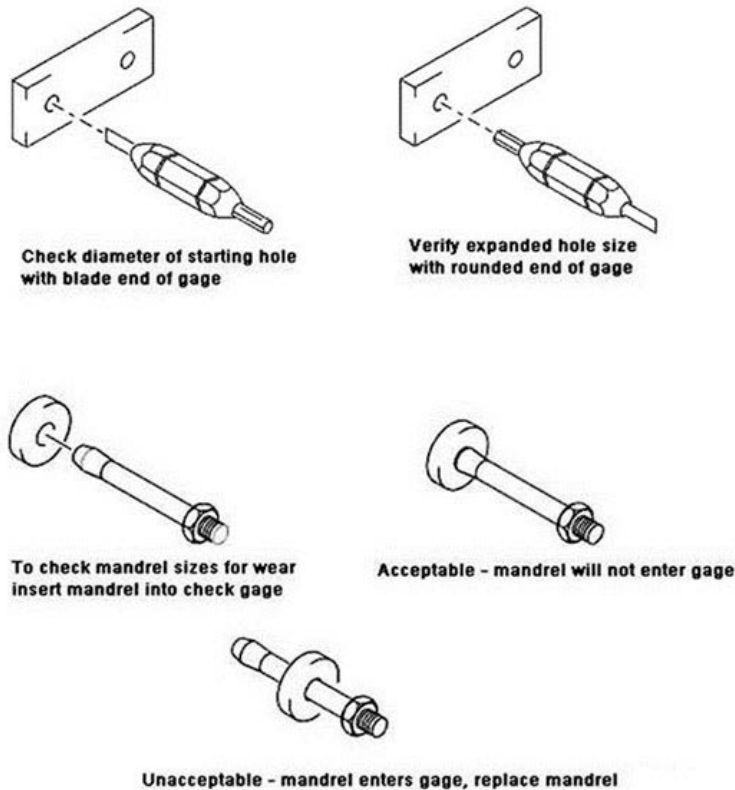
Checking mandrel for proper cold expansion procedure.
